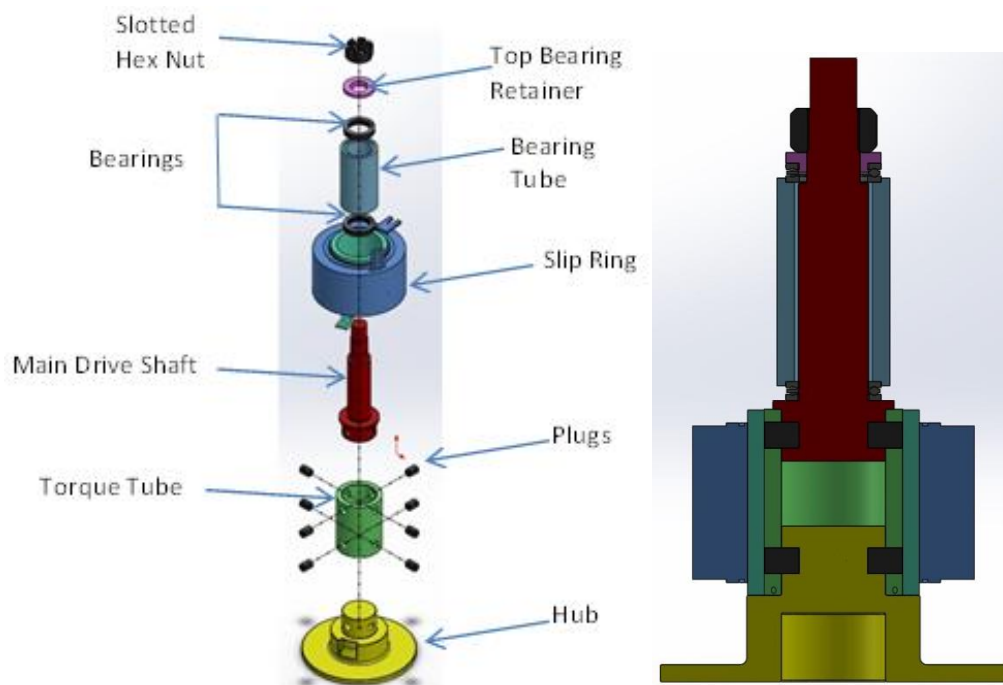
Drive Shaft Sub-Assembly Exploded and Section Views (3D CAD Model)
